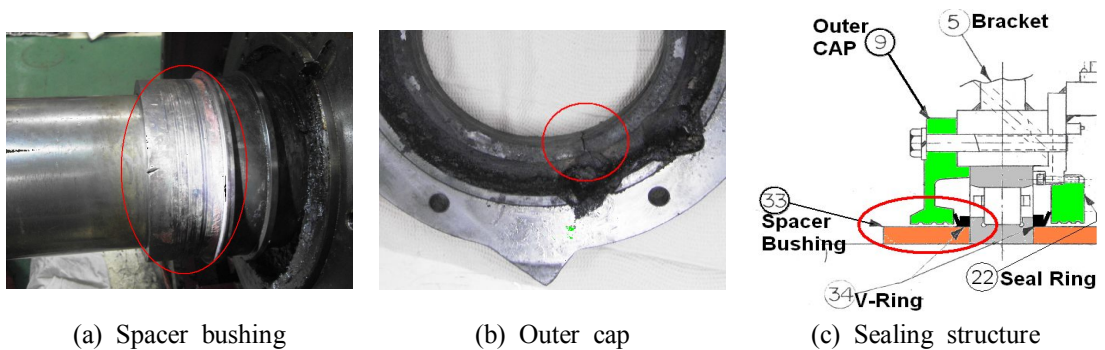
Outer cap/sealing ring and shaft spacer contact overheating
